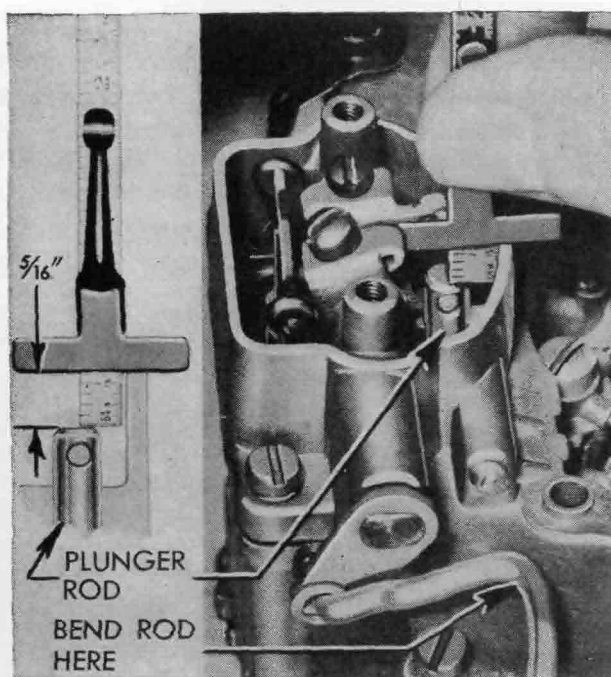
Checking adjustment of accelerator-pump plunger with scale. (Buick Motor Division of General Motors Corporation)
